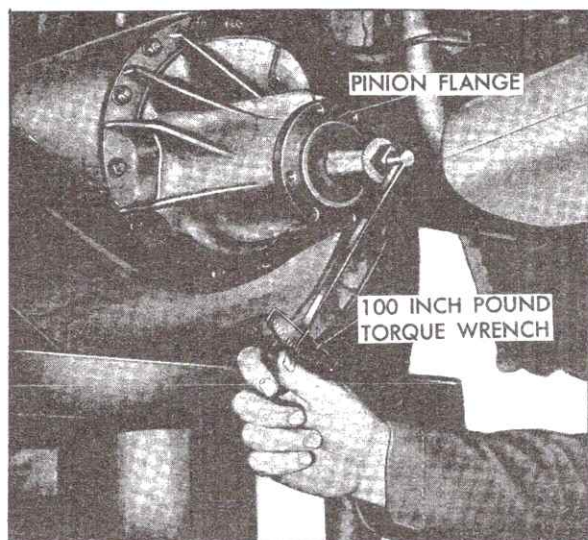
Checking Pinion Shaft Pre-Load Torque
